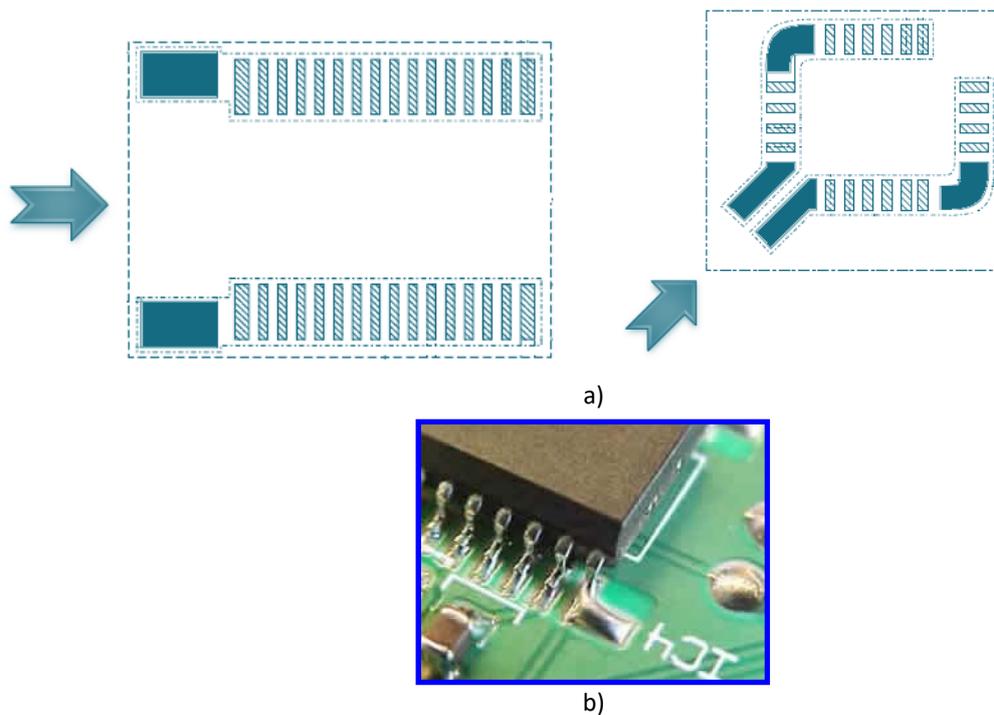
Solder thieves (ST) created in PCB footprints (a) and a zoom of a real ST in the frame of an electronic module (b)
